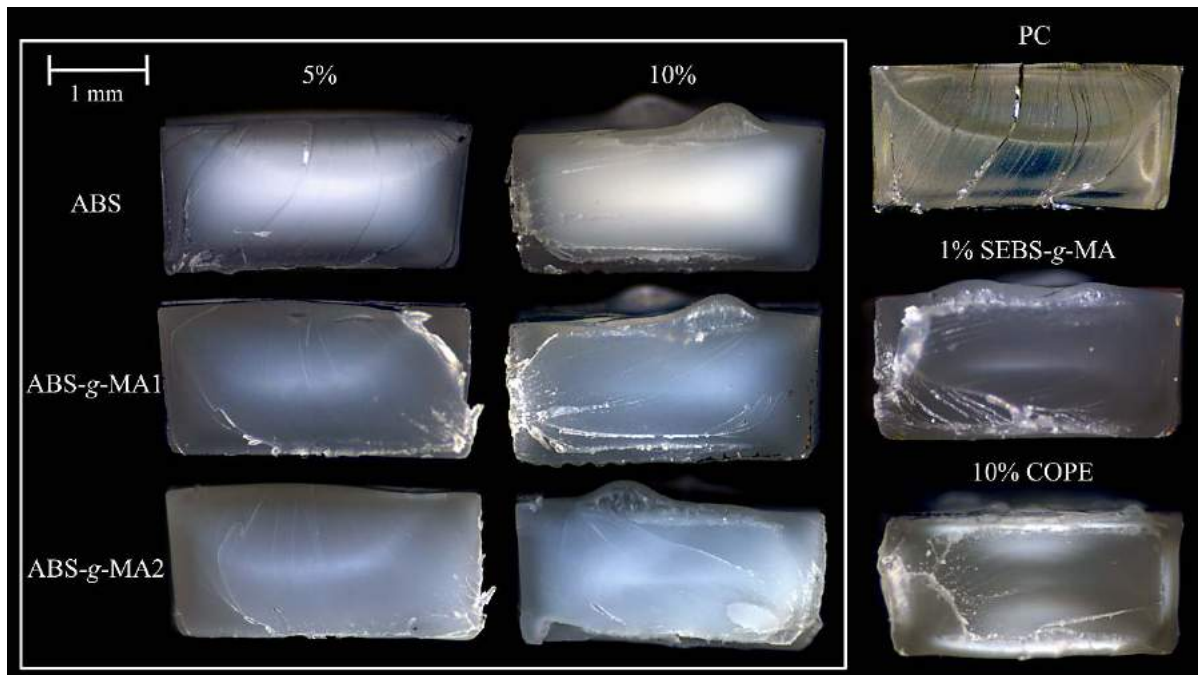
Cross-section view of the fracture tensile specimens at high-speed test conditions.
